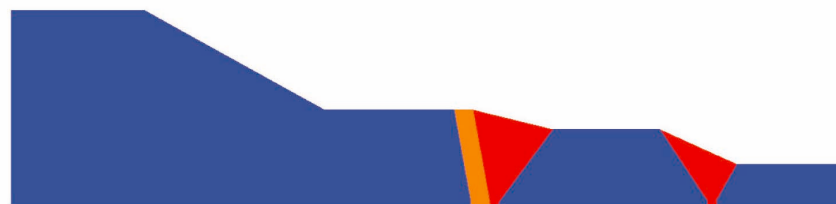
Welding Sequence for Mock-up Fabrication
